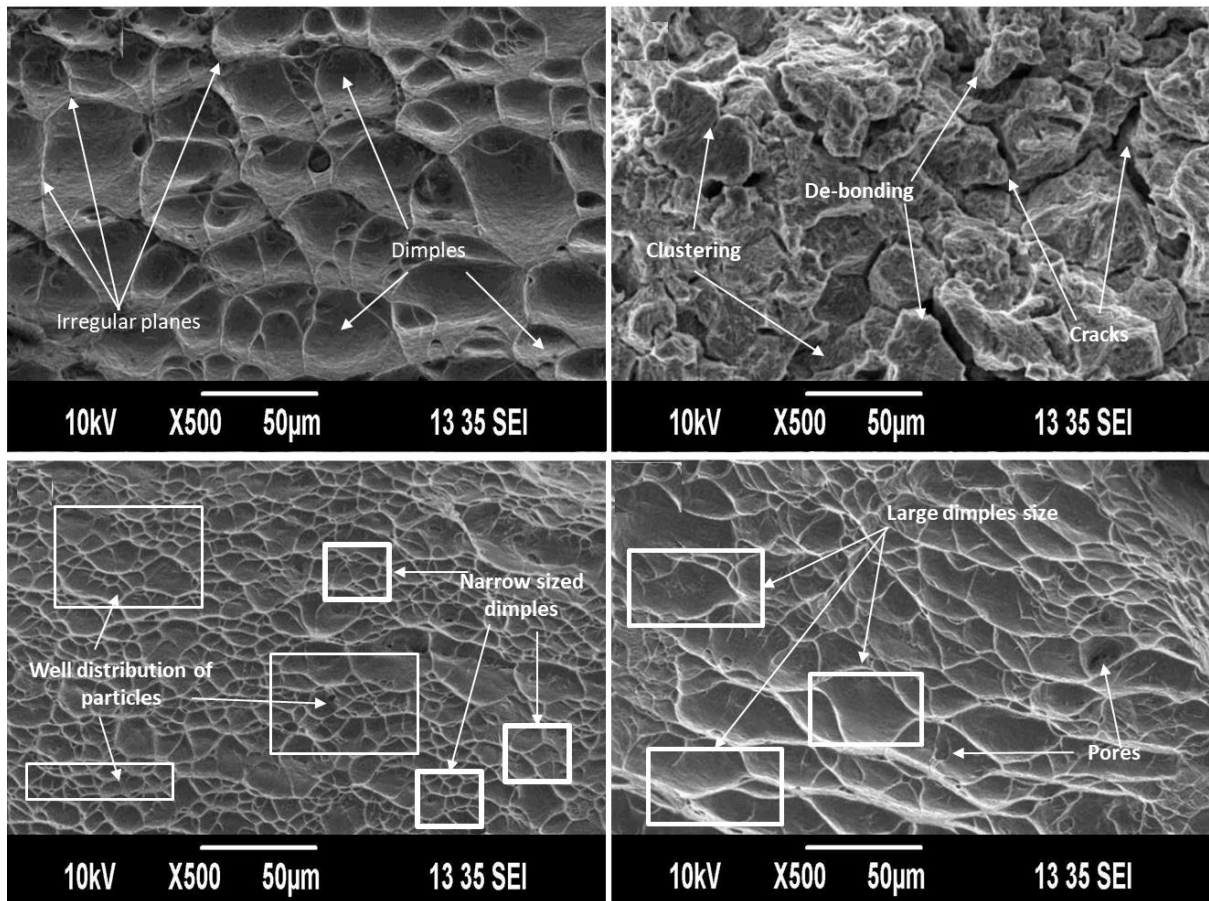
Fractography of tensile tested specimens; Al-6061 base alloy (H1-0C0G), H2-3C1G specimens, H3-3C3G specimens, and H4-1C3G specimens
